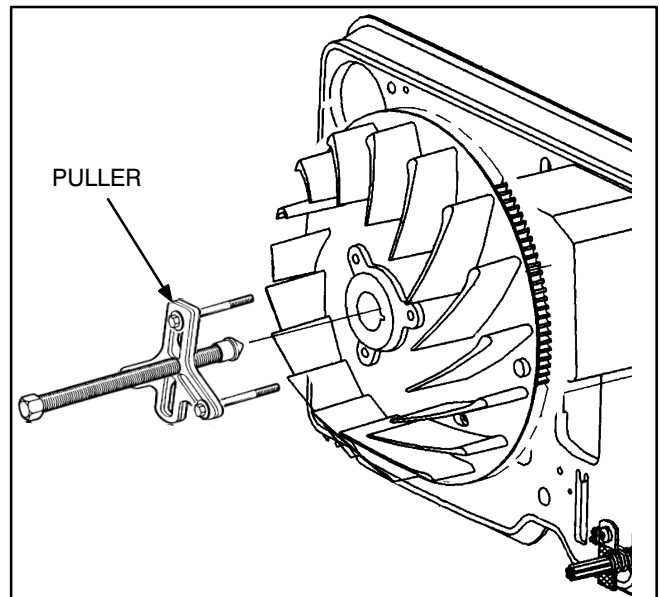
PULLING THE FAN HUB ASSEMBLY
